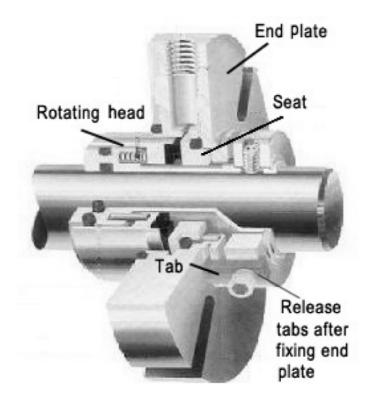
Cartridge Seal – Seal Tension is Achieved after Releasing Tabs
